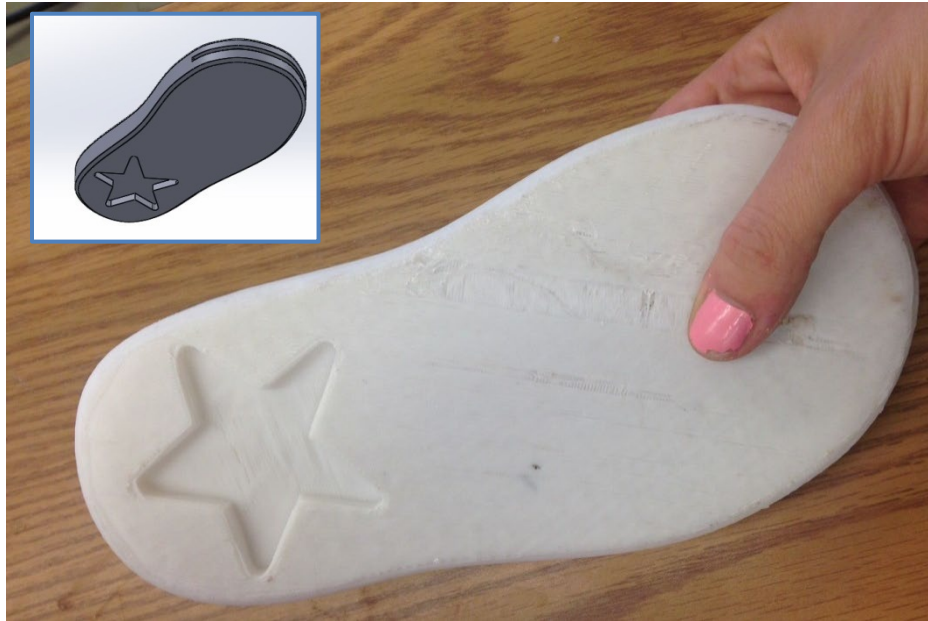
Tread Example on Rod/Curtain Design with CAD Model Insert
